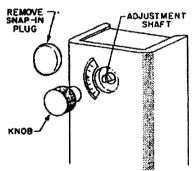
Drawing showing snap-in plug removed and the knob in line to assemble. Press the knob onto the slotted shaft.
